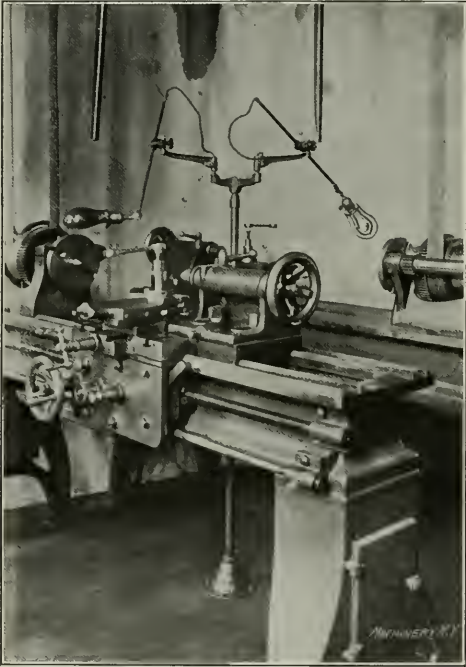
Engine Lathe with Electric Light Holder in Rear.
